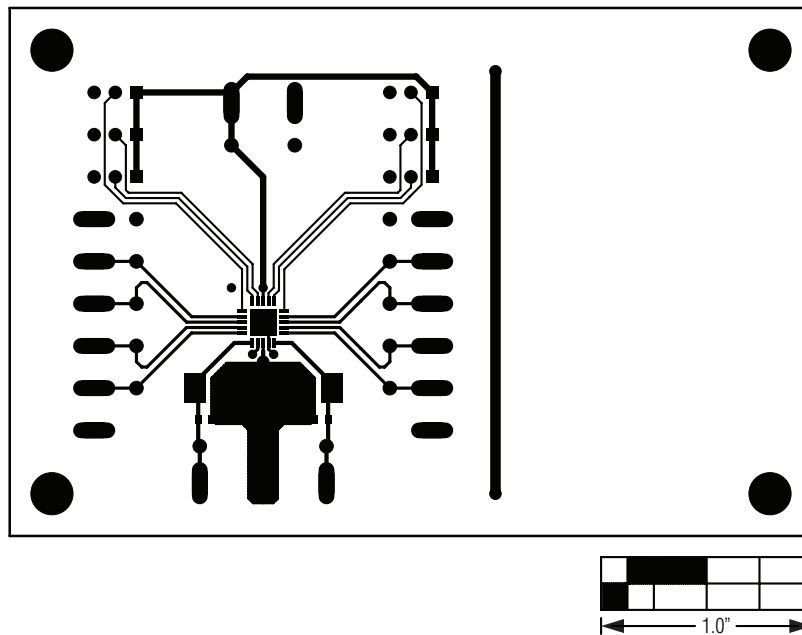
MAX14778 EV Kit Component PCB Layout—Component Side
